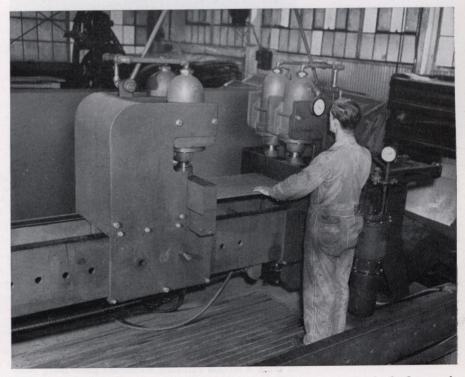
Embossed aluminum sheet being stretched to produce perfectly flat panels in plant of Rigid-Tex Corp., Buffalo, N. Y. Stretcher takes sheet up to 36 x 96 inches; 40-ton grip holds sheets; 7-ton force stretches them.
